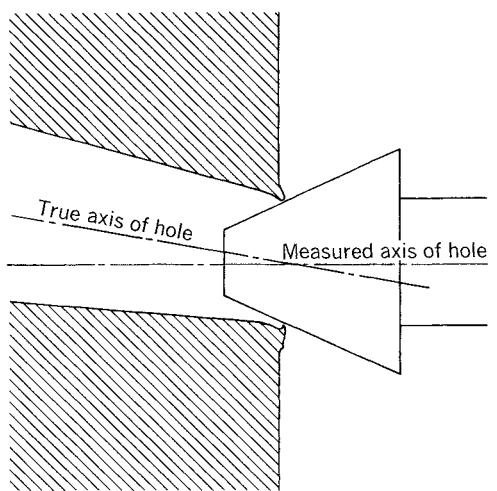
The taper-probe of a CMM records hole location quickly but does not truly establish the axis of the hole, nor analyze hole "geometry."
